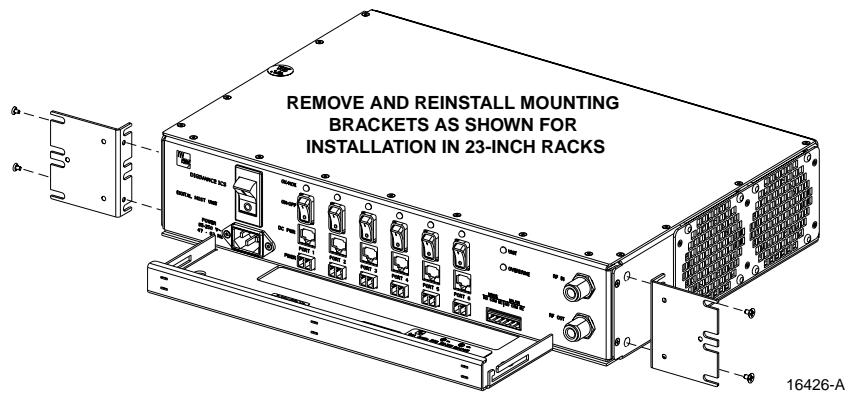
Installing the Mounting Brackets for 23-Inch Rack Installations
